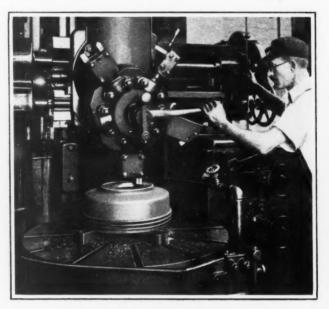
Machining Gun-iron Brake-drums with Carboloy Tools at the Rate of About 5.5 Pieces per Hour; Number Machined per Tool Grind: Roughing, 300; Finishing, 1500
